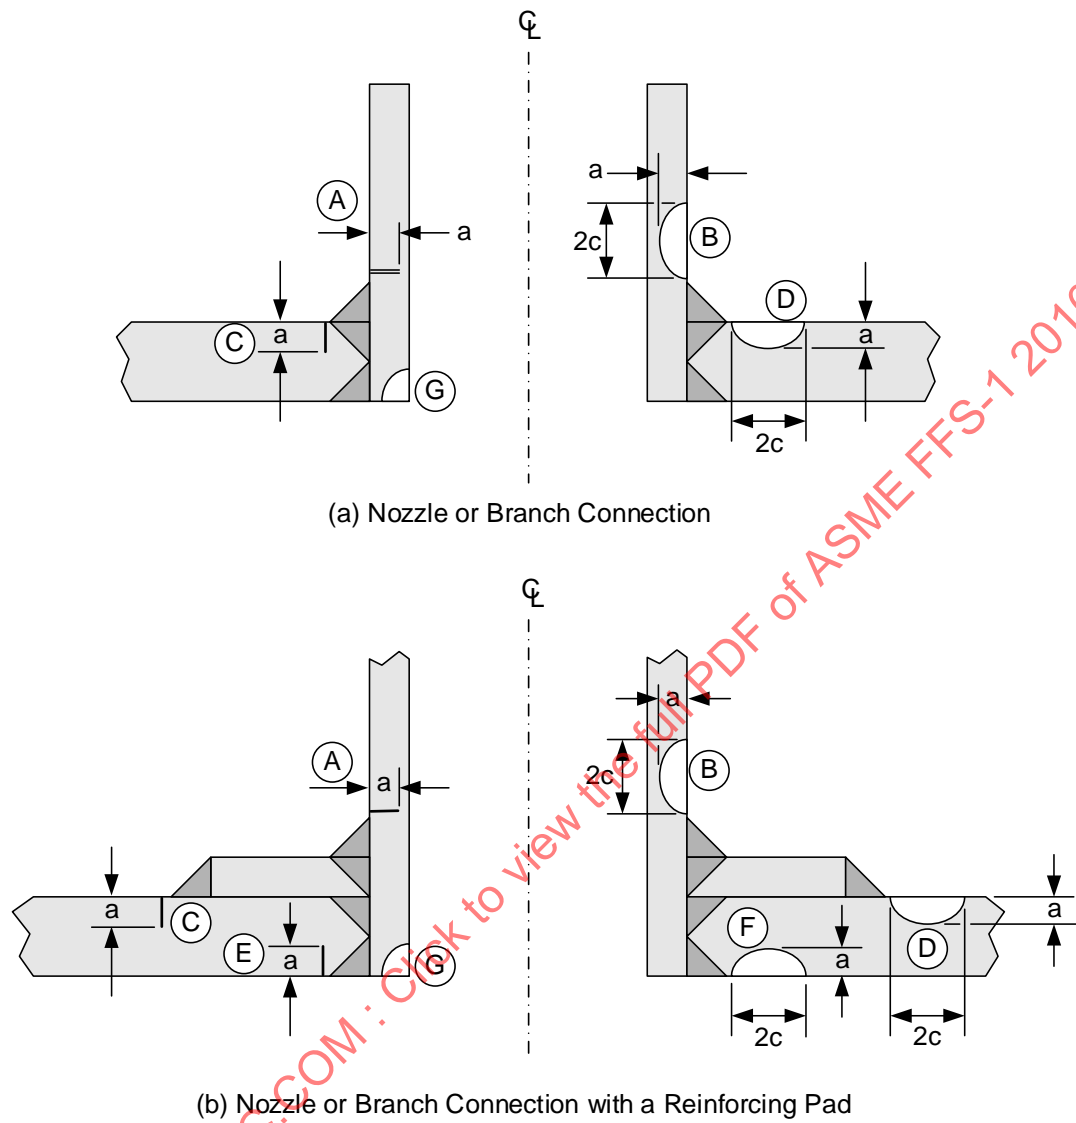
B.26 – Cracks At Nozzles And Piping Branch Connections
